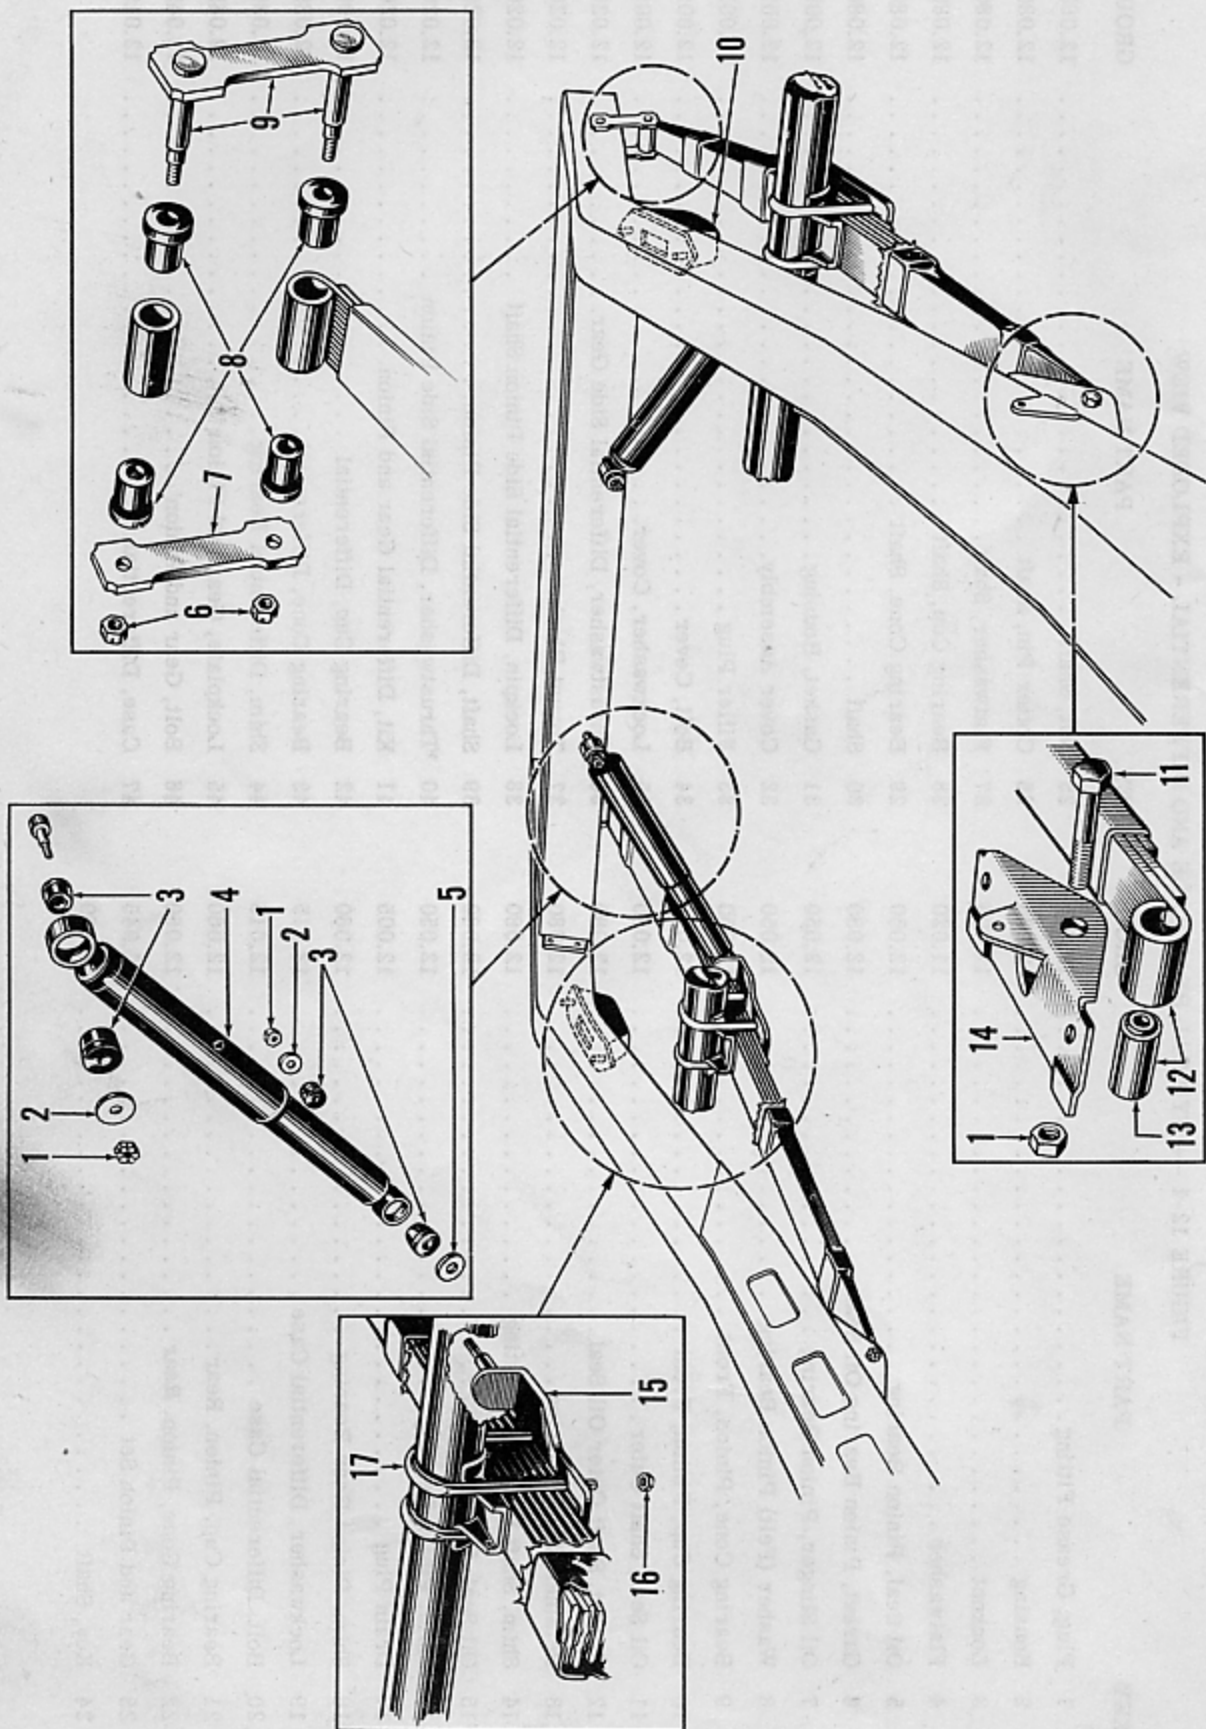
TYPICAL REAR SUSPENSION - EXPLODED VIEW
